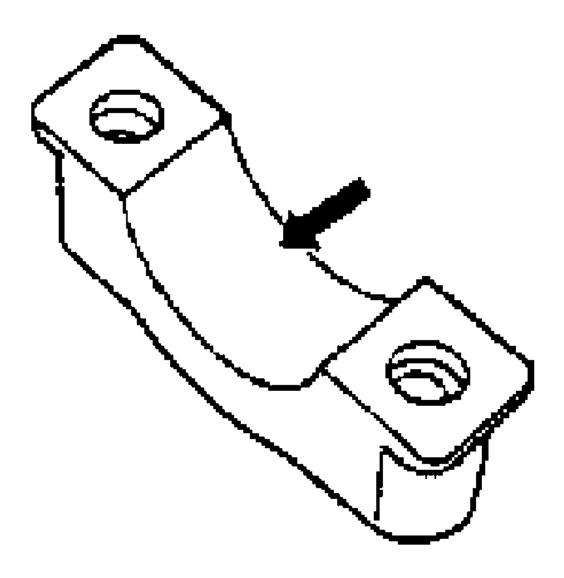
Identifying Camshaft Journal Wear Courtesy of SUZUKI OF AMERICA CORP.
